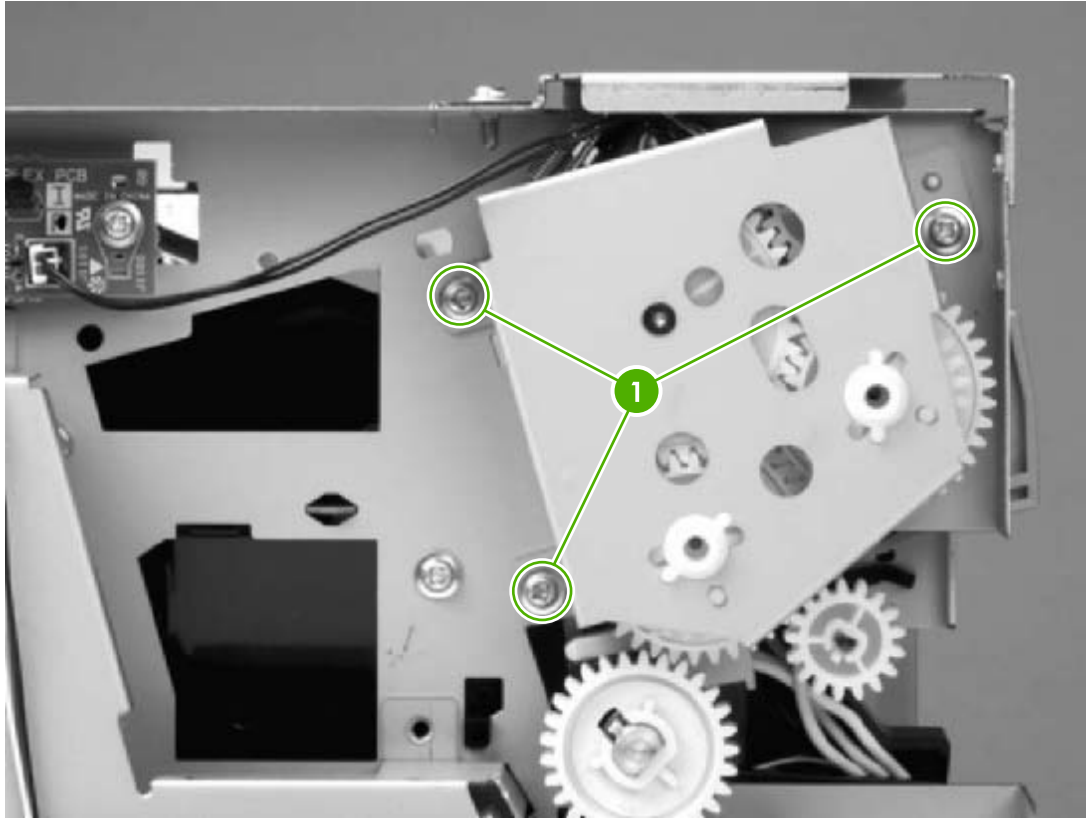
Removing the duplex-drive gears (1 of 2)
